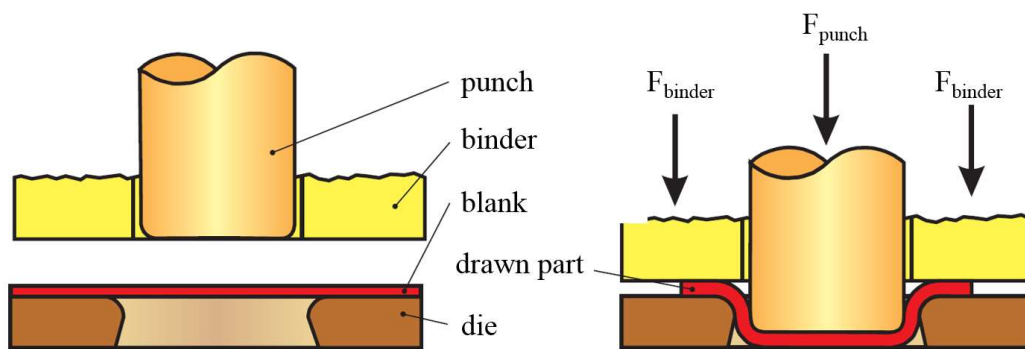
Schematic representation of deep drawing with a rigid tool [9]
